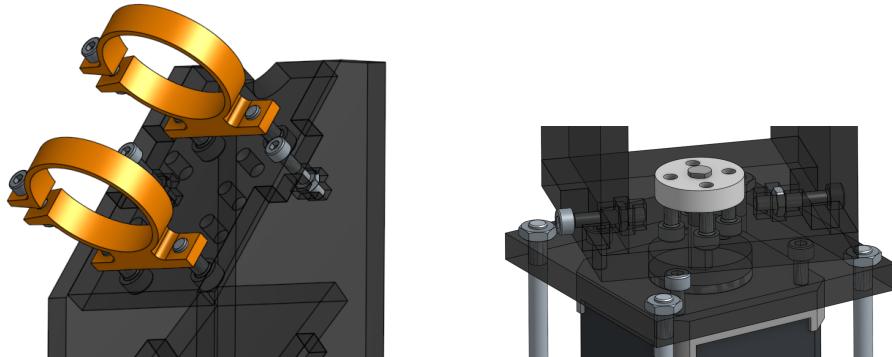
Left: Pipette Clamps and Tower, Right: Towers base mounting to the motor shaft
